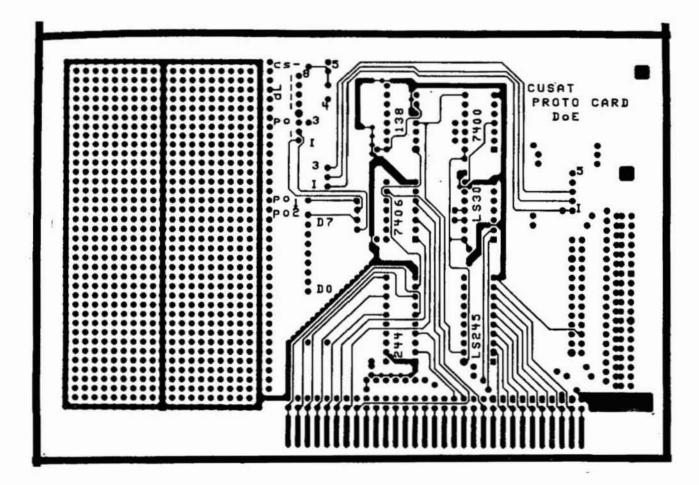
(b) Layout of PCB for PC interface module (Component side)
